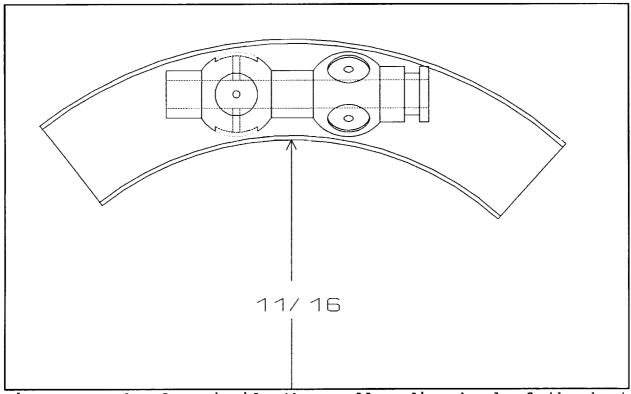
Probe form inside the small radius bend of the heat exchanger tube
